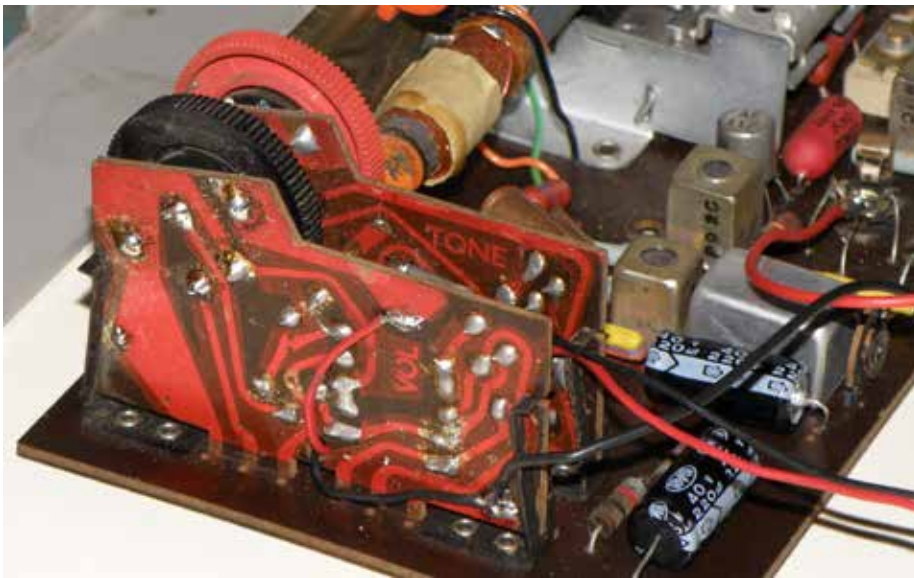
Close-up of the two soldered-on audio sub-boards, mounted at right angles to the main PCB, which contain the volume and tone controls and associated components.
